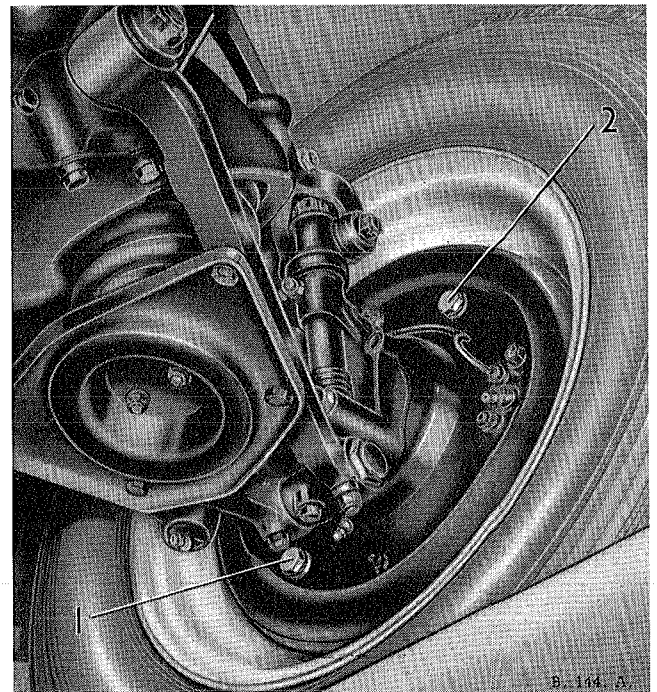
Showing the location of the two brake shoe adjusters on a front brake backplate.
